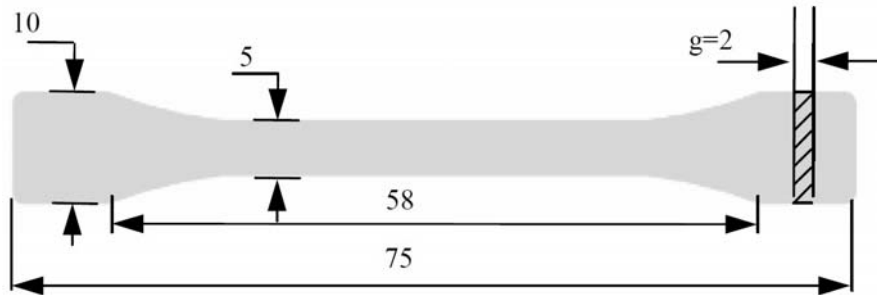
Geometry for tensile testing of 3D-printed parts (units in mm).
